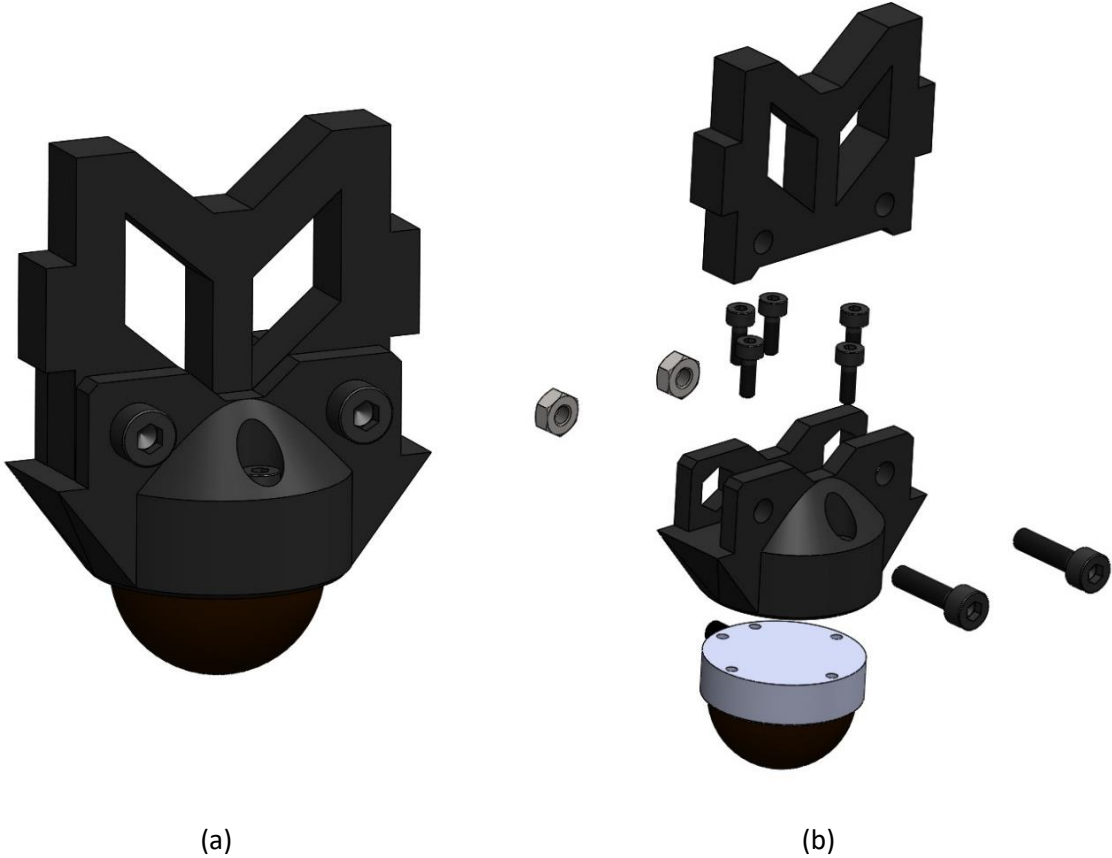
Assembly of new PhantomX foot with OptoForce sensor: (a) fully assembled view; (b) exploded view
